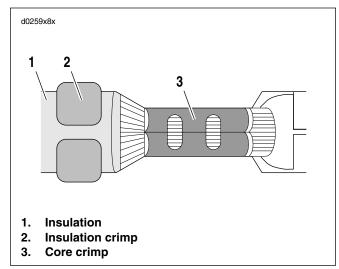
Inspect Core and Insulation/Seal Crimps
